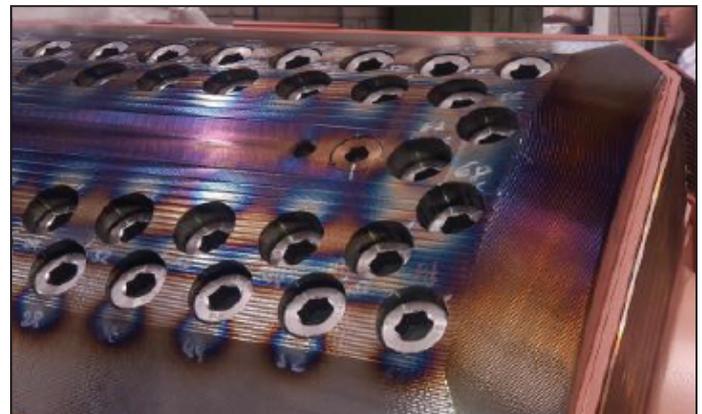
Generic view of Motor – Rotor Shoe Pole Overheating
